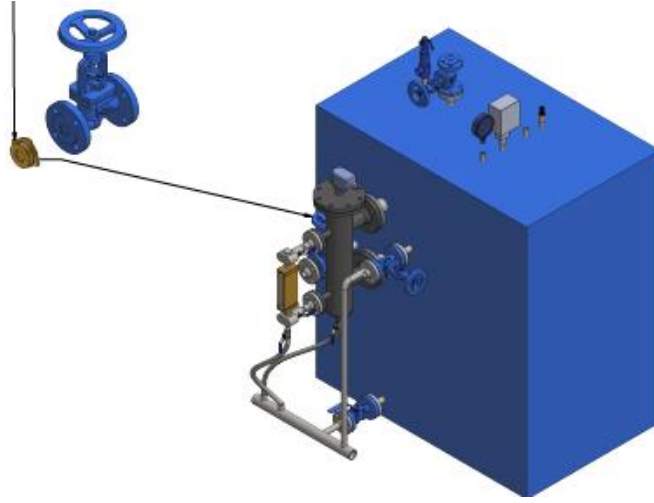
Boiler Water Inlet Valve & Check Valve
